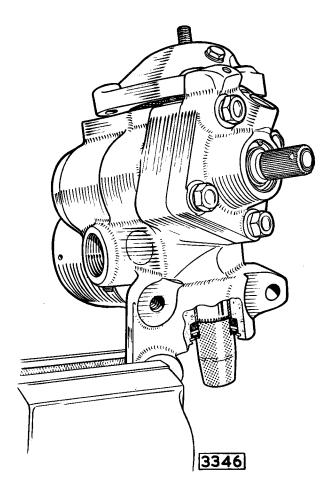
Refitting the sector shaft using the special tool (Churchill Tool No. J.34),
